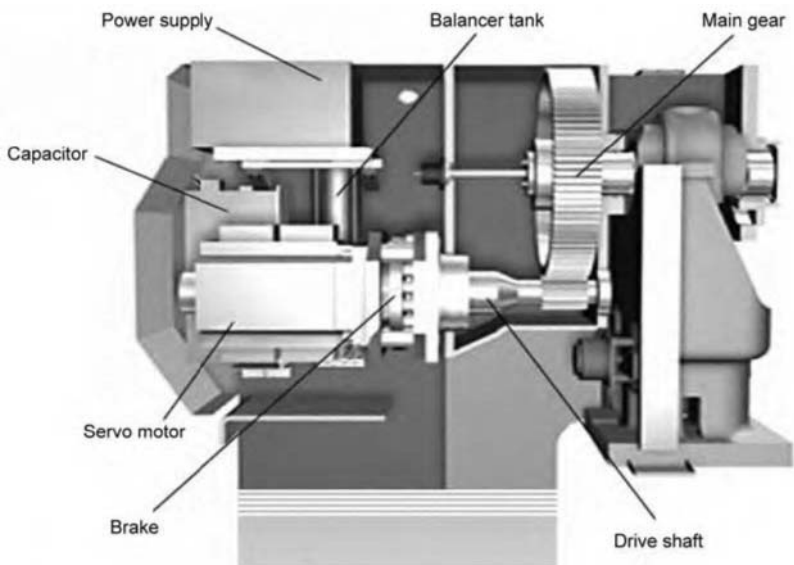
Direct gear-driven gap press with servo drive, where the high-torque servo motor is directly coupled to press drive shaft. Source: Ref 11.6
